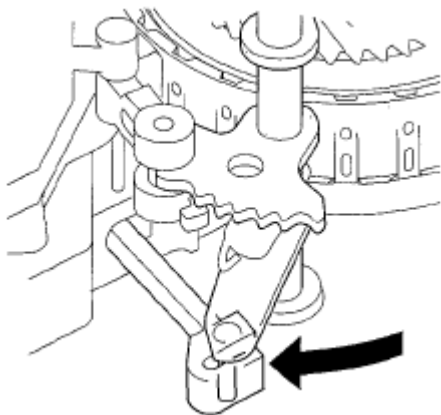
Identifying Control Lever Pin With Manual Valve Guide
